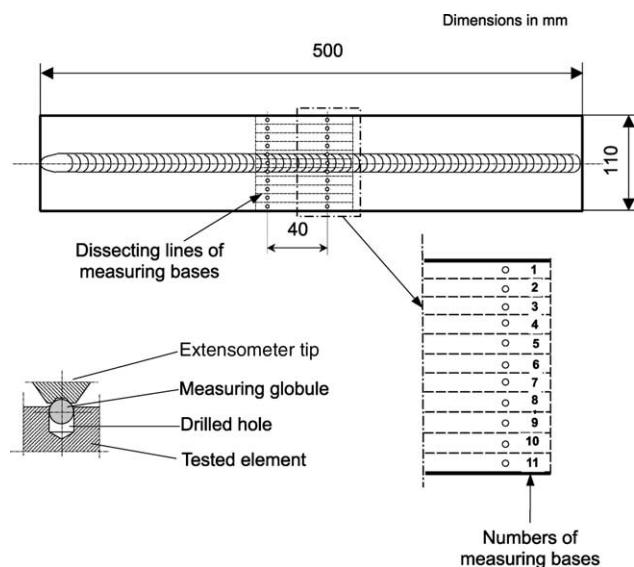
Welded test plate geometry showing the location of the measuring bases.
